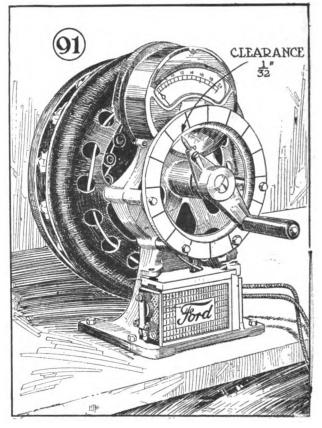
This coil-unit testing machine is used for testing the units and adjusting the vibrators to the best possible position
